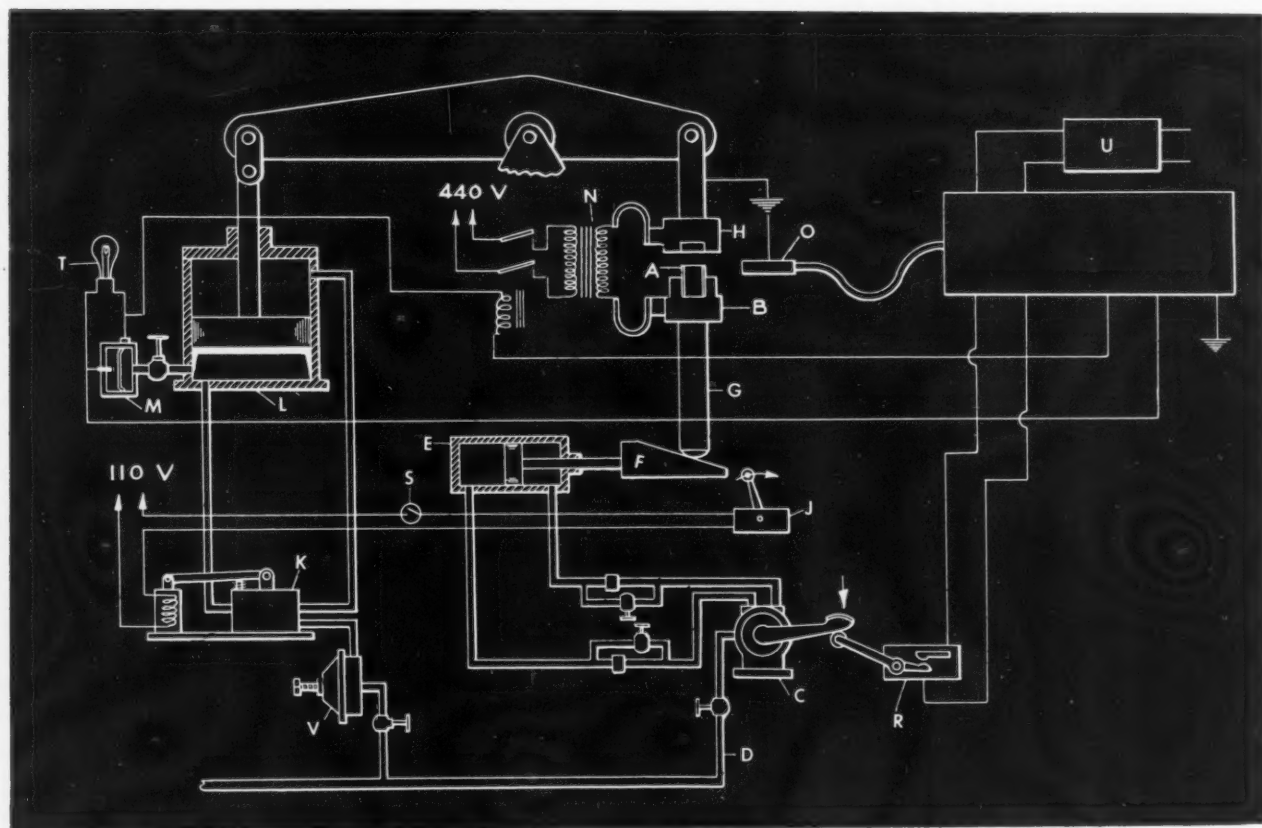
Method of hot-forming tubular parts. Work-piece (A) is heated and compressed between dies (H) and (B). A photo-electric control unit (O) regulates the temperature to which the part is heated
